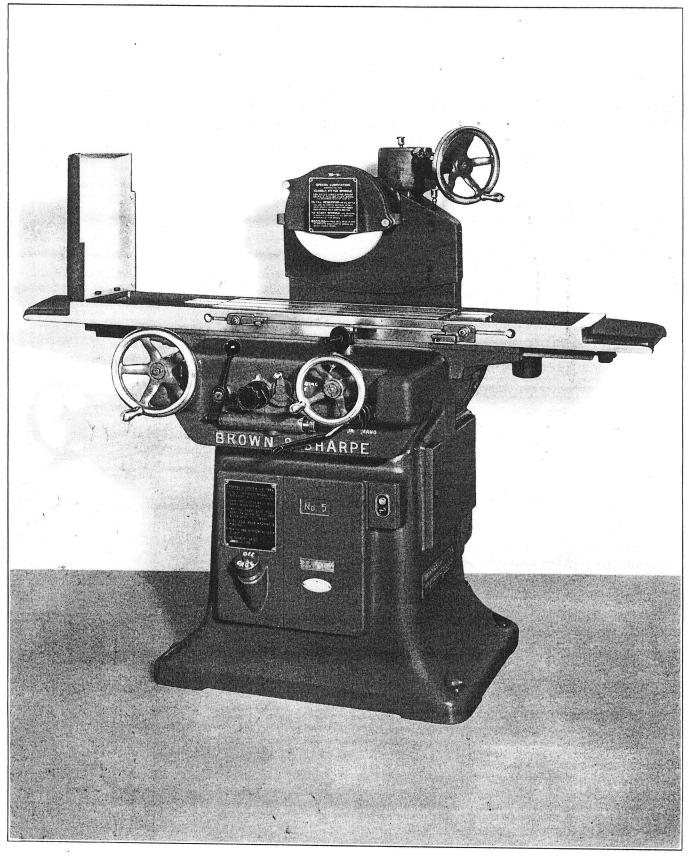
The No. 5 Surface Grinding Machine (Hydraulic Type).
